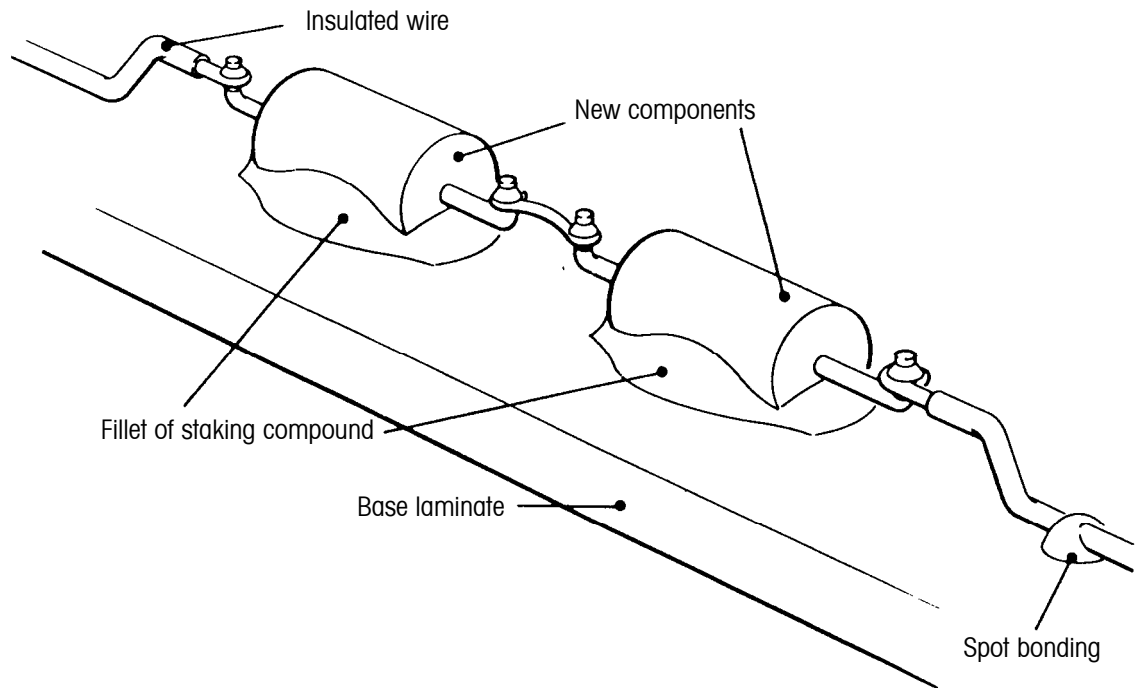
Mounting and wiring of additional axially-leaded components mounted (on reverse side or on component side of board) using staking compound
